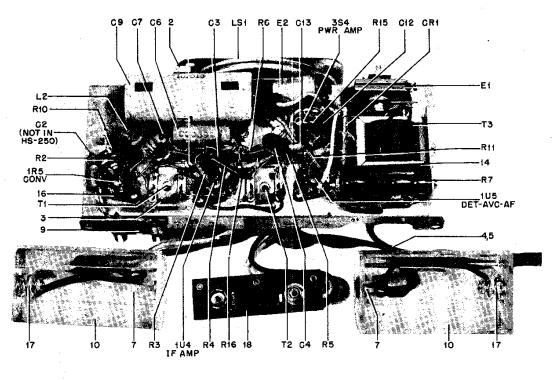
BOTTOM VIEW OF CHASSIS HS-224 AND HS-250 SHOWING MULTIPLE CAPACITOR-RESISTOR PLATE
